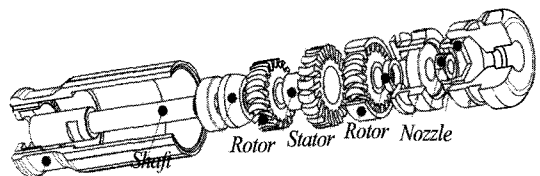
Cut off view of small air tool grinder operating by two stage axial type turbine
